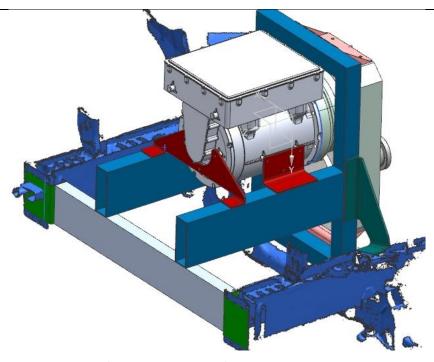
Front 3D view of the powertrain sub frame with the motor and gearbox assembled
